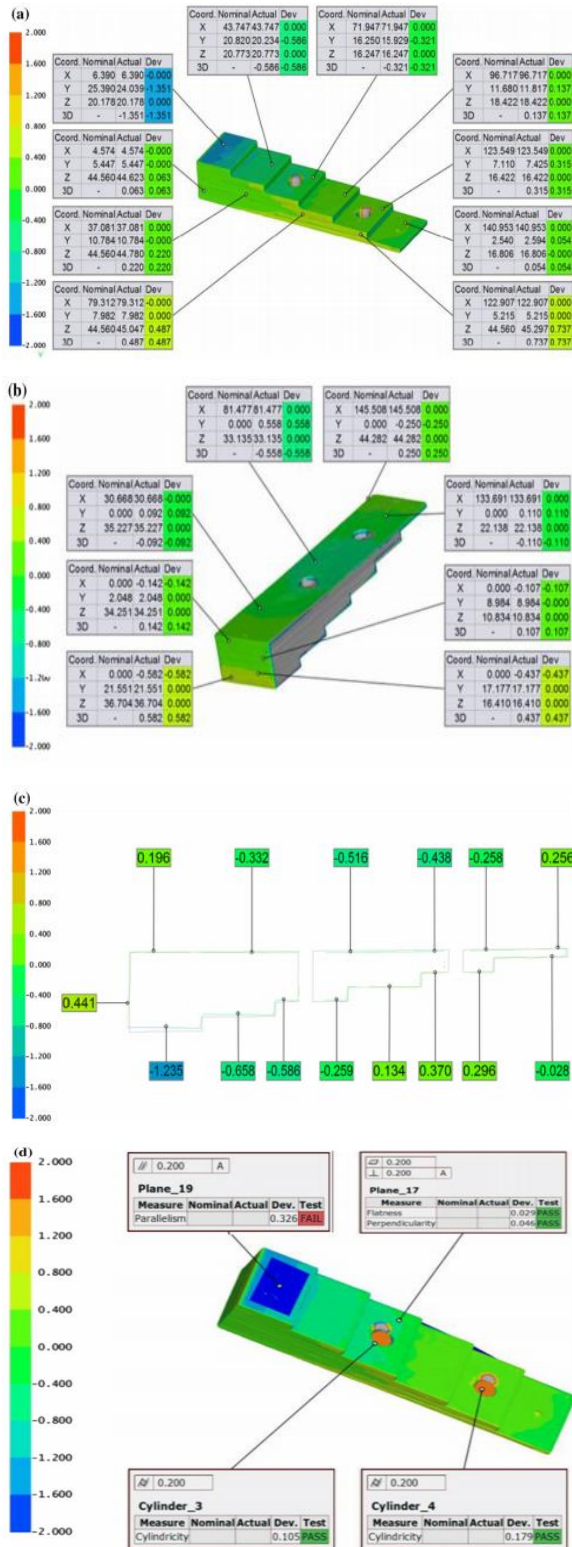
Inspection of stepped bar (a) Upper side Inspection (b) Lower side Inspection (c) Cut Section deviation (d) GD&T inspection (img Source: J. Inst. Eng. India Ser. C DOI 10.1007/s40032-016-0337-7)
